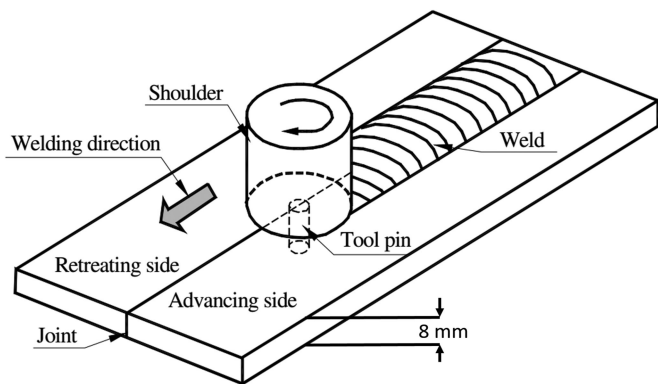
Illustration of a butt weld using friction stir welding [9].
